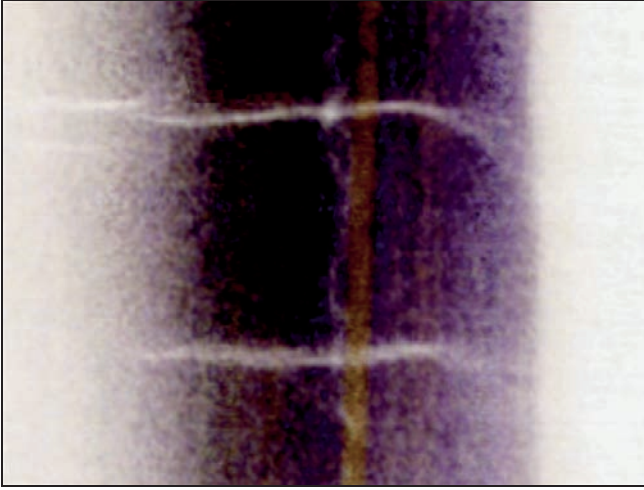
Passing cracks transversal to the weld bead of a Fe 410 vessel after exercise.
